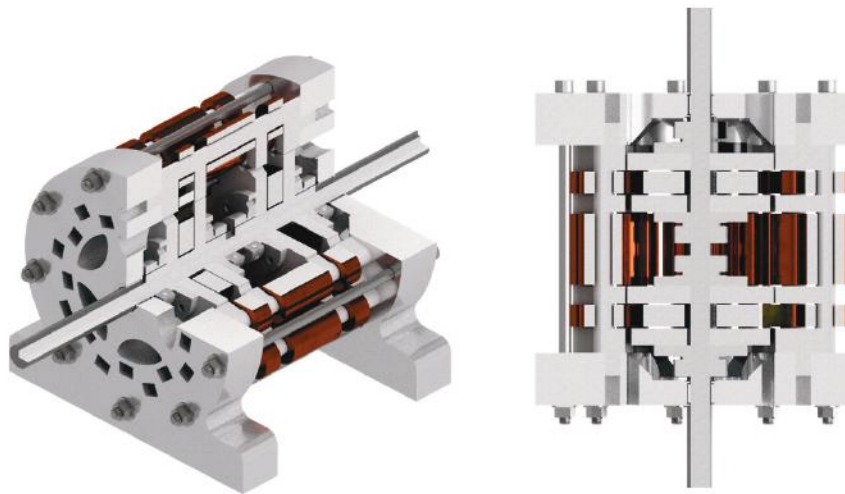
Prototype DHAM CAD cut-off views.
